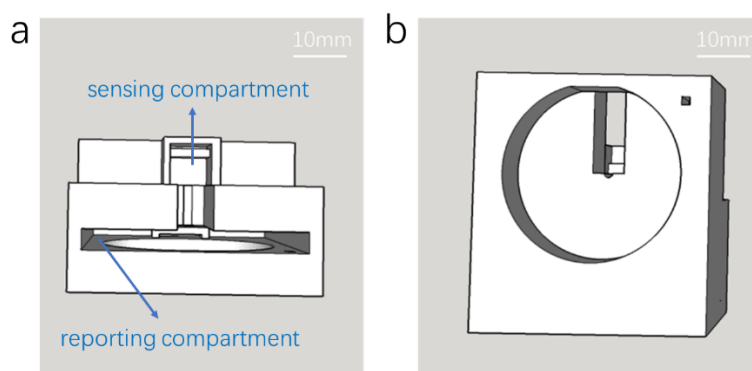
Top view (a) and side view (b) of the mounting cell.
